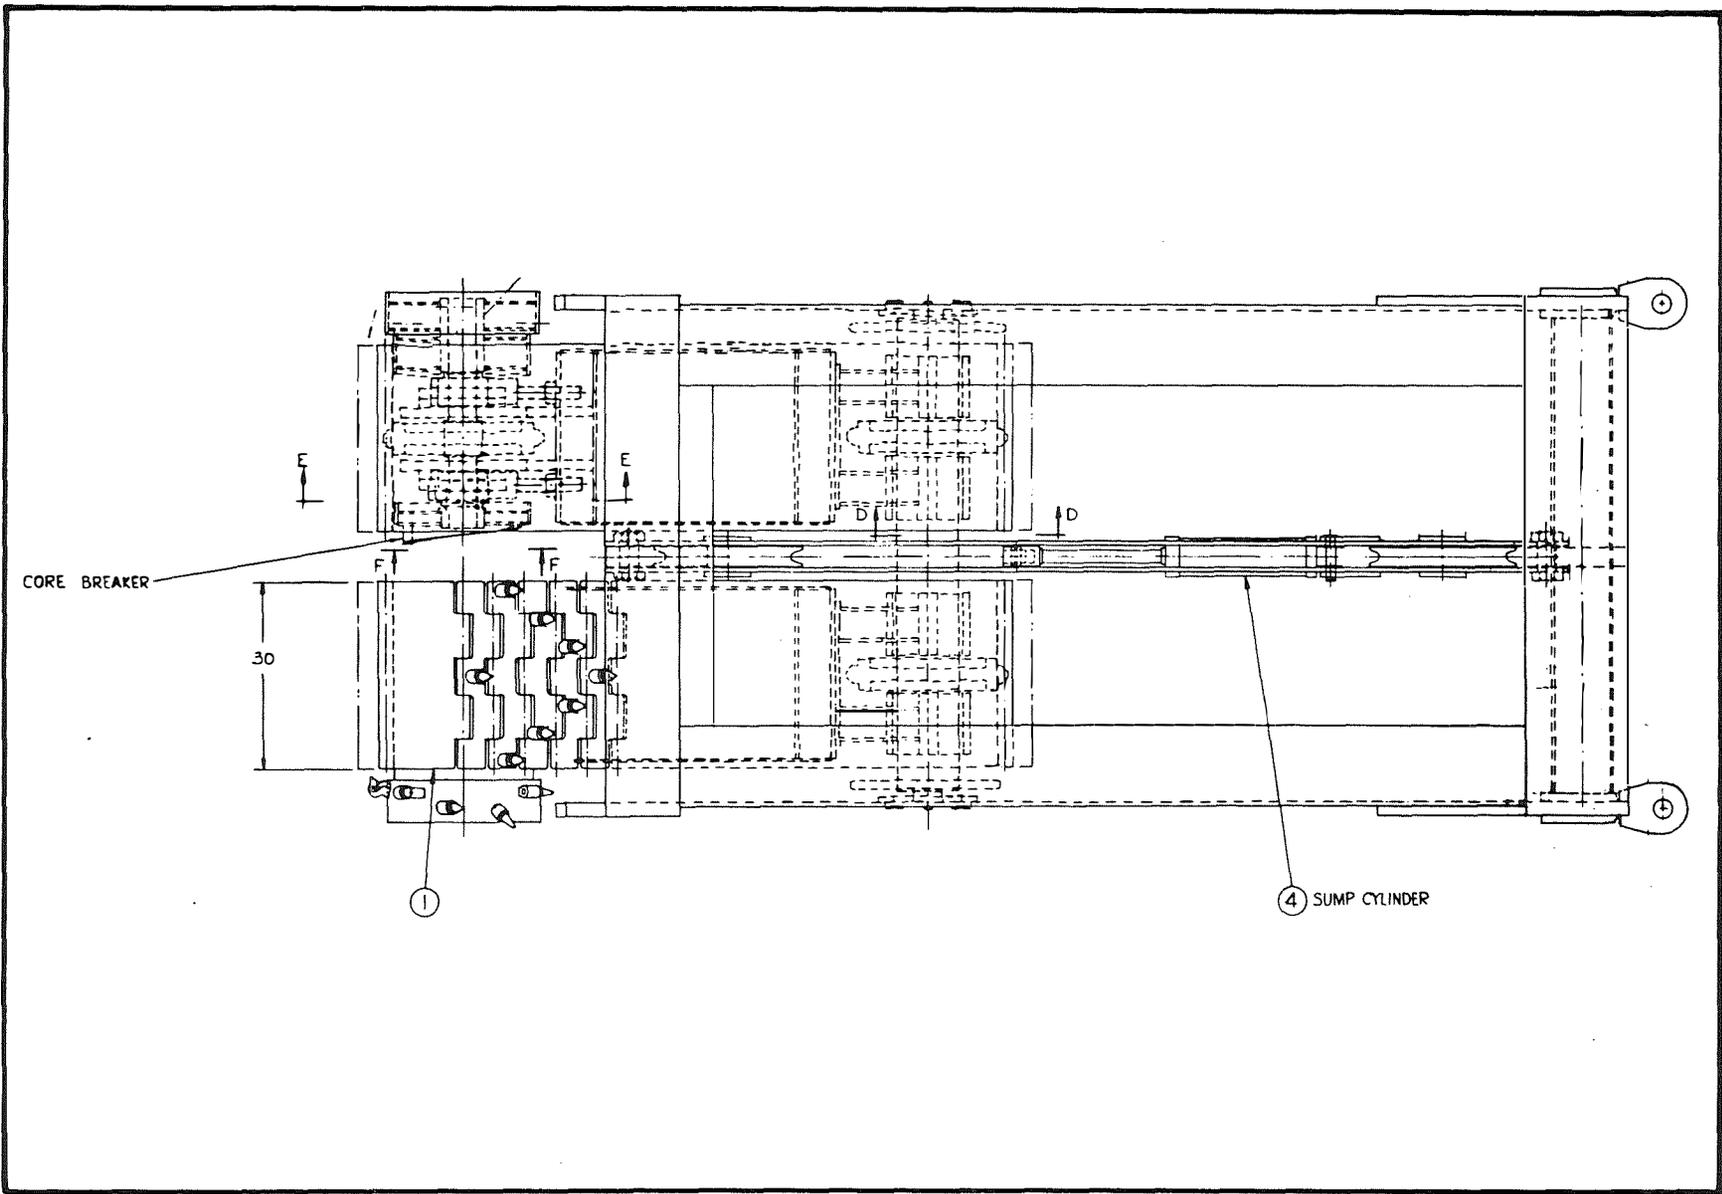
MOTORIZED BUCKET (Sheet 1 of 3)
